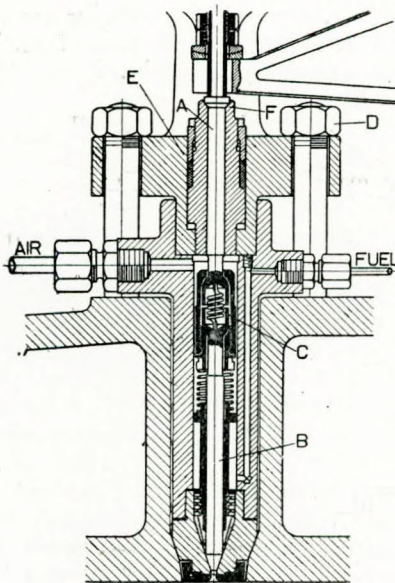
Diesel Engine Fuel Valve (Mirrlees).
